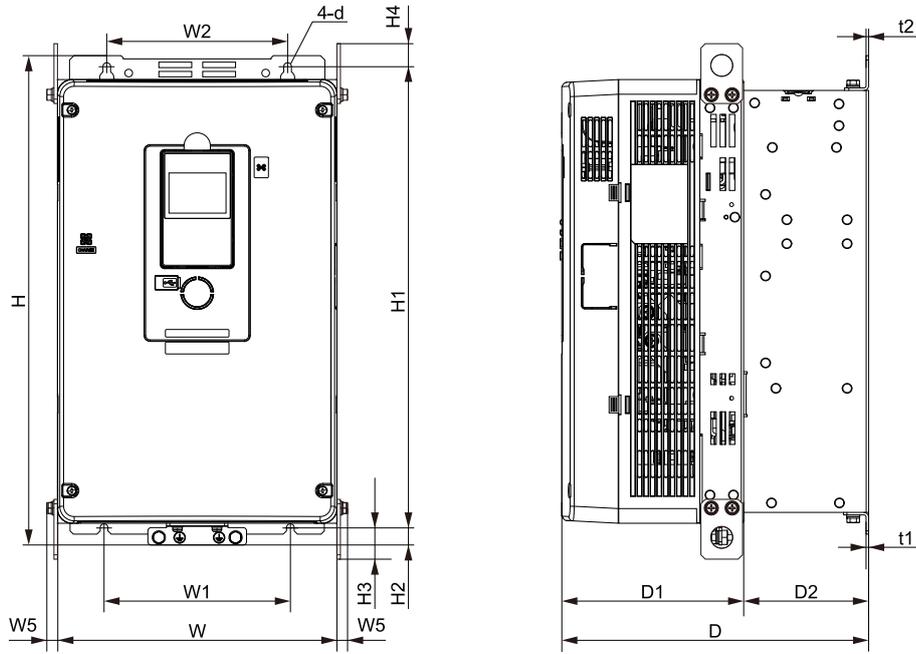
Exterior and Mounting Dimensions Diagram 5
